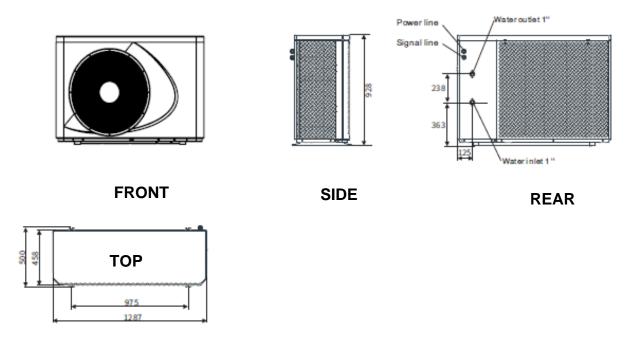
AS02-R290 Casing Dimensions & Heating Connection Locations
